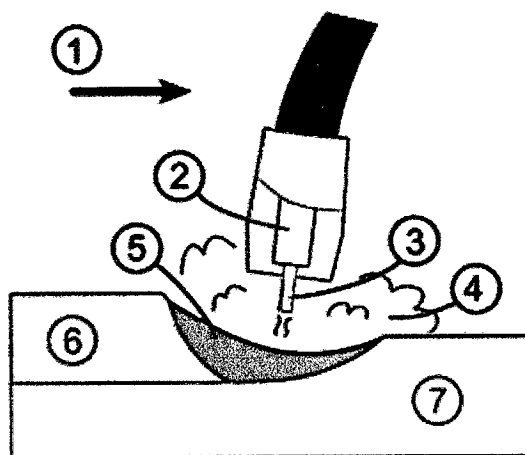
GMAW weld area. (1) Direction of travel, (2) Contact tube, (3) Electrode, (4) Shielding gas, (5) Molten weld metal, (6) Solidified weld metal, (7) Work piece.
